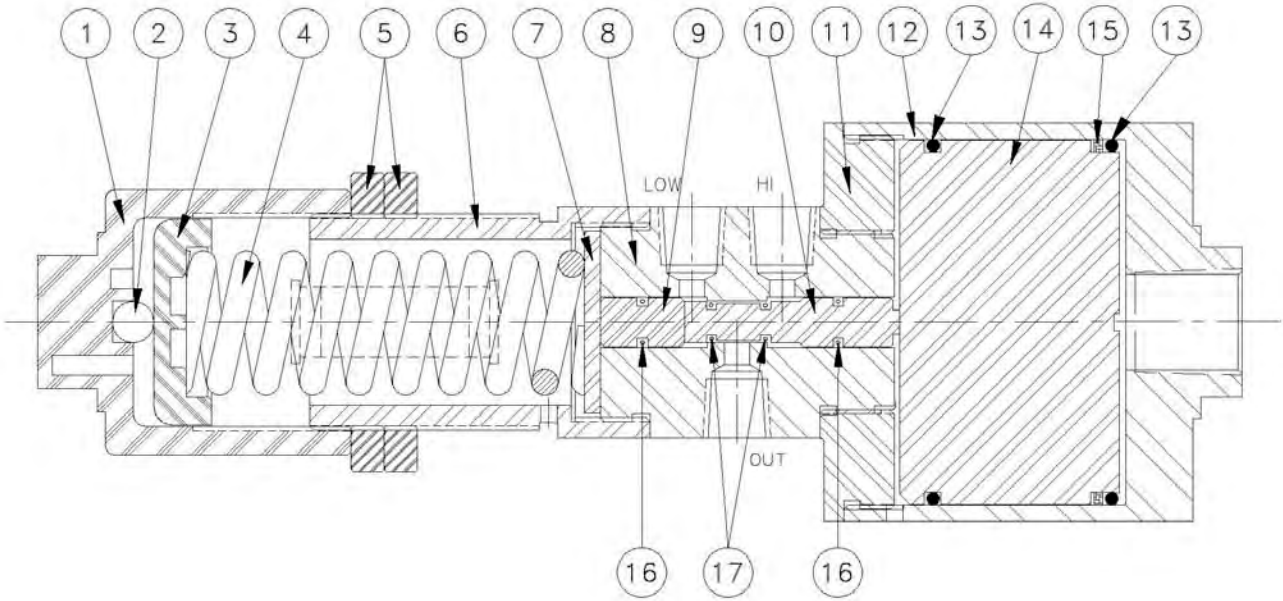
1/2" Piston Arrangement Enlarged Detail Drawing
